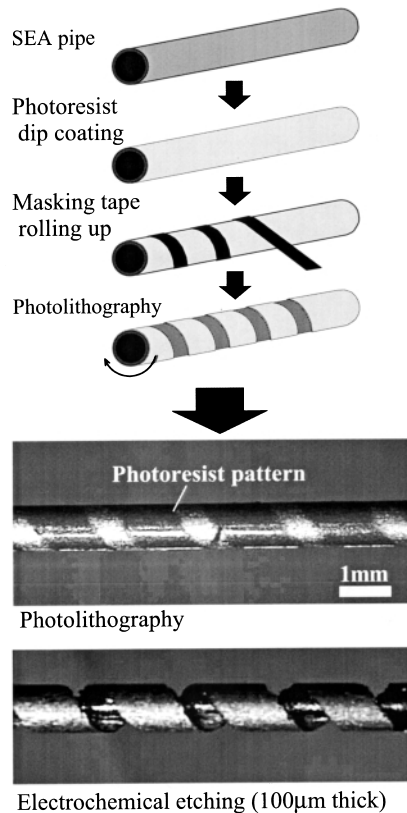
Helical etching of SEA (NiTi) pipe using electrochemical etching.
